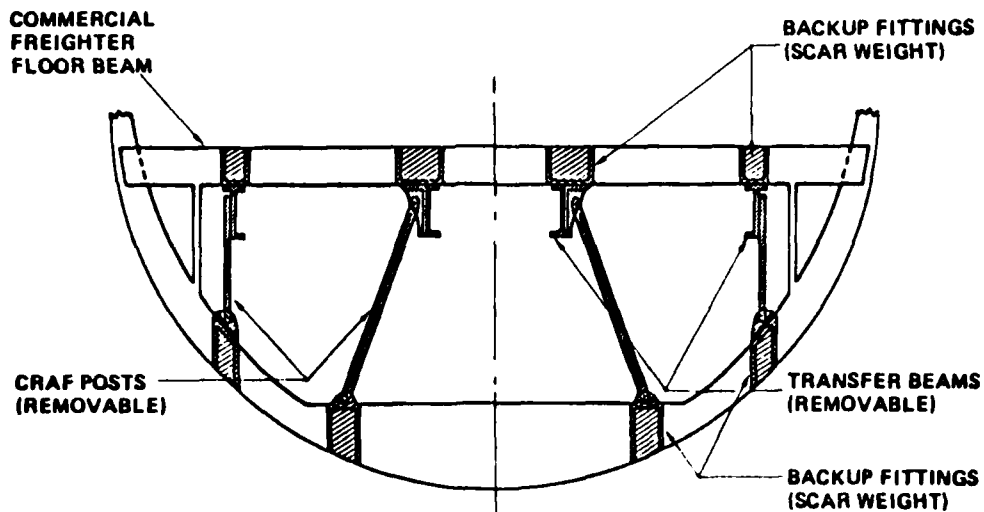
Strengthening Concept - Commercial Freight Floor
